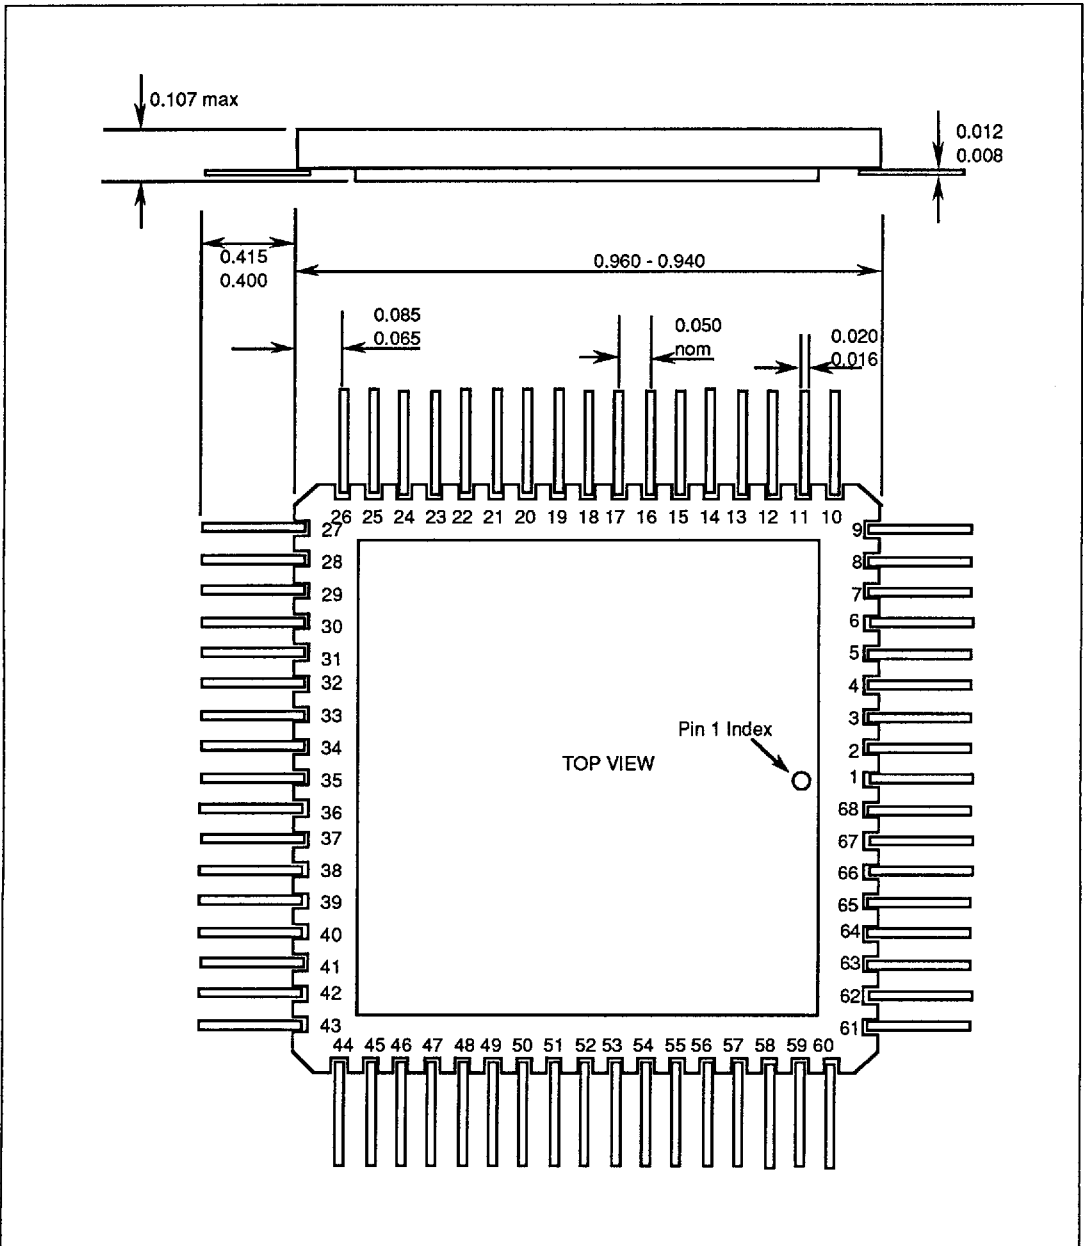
Dimensional Drawing of 68 Pin Lead Flatpack - Package Style F
